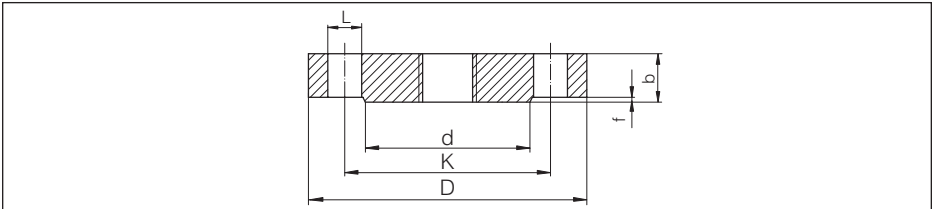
Dimensions: EN flange EN 1092-1 (seal ledge B1)
